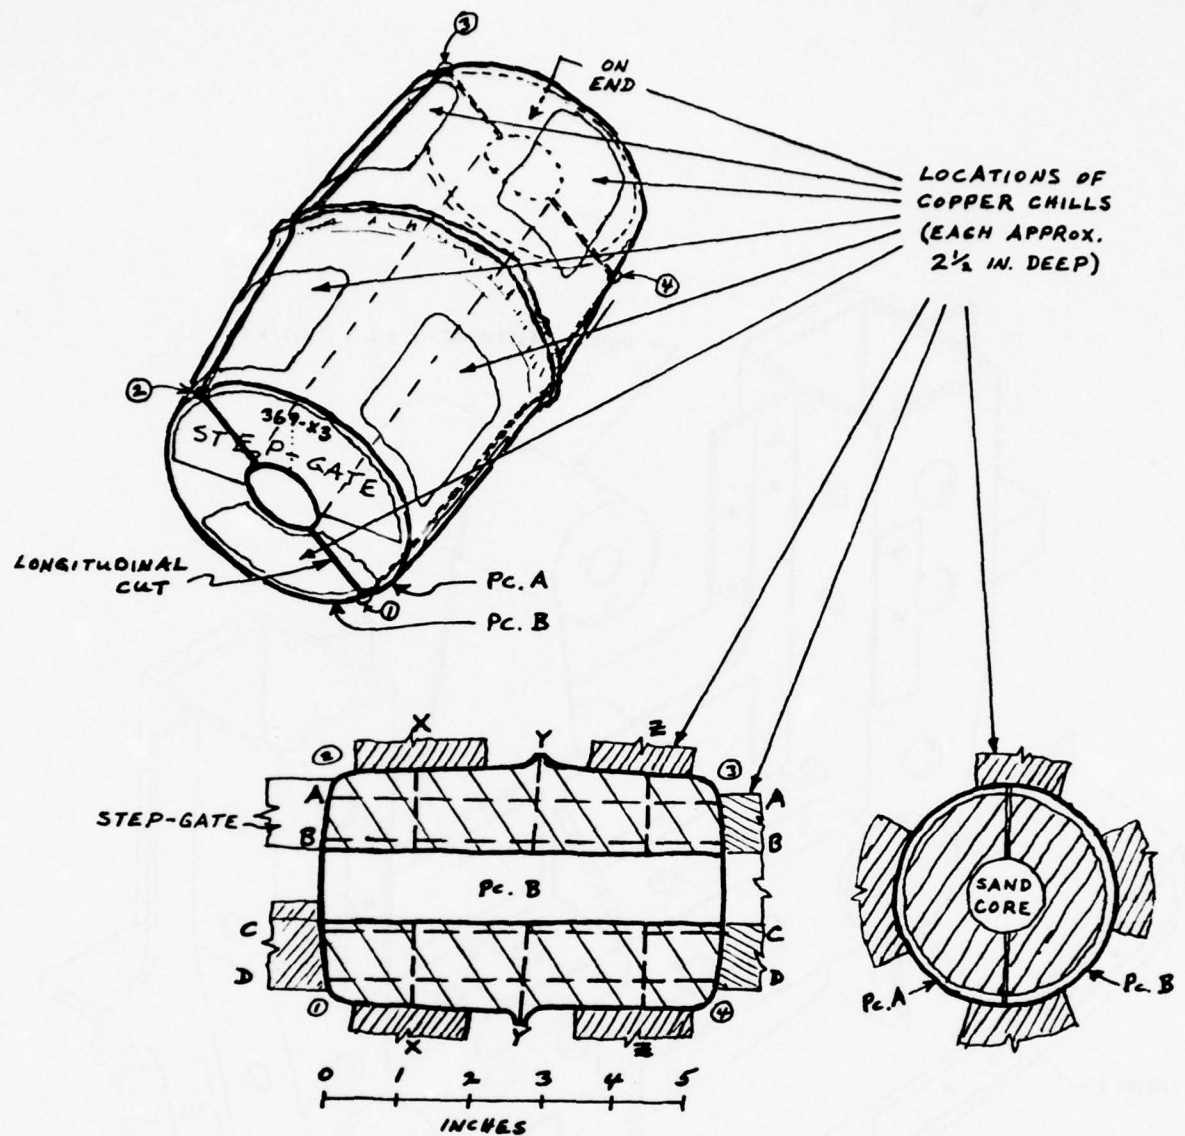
INTEGRAL CAST FITTING FROM BOEING ALLOWABLES PREPRODUCTION PART B CASTING S/N 369.
